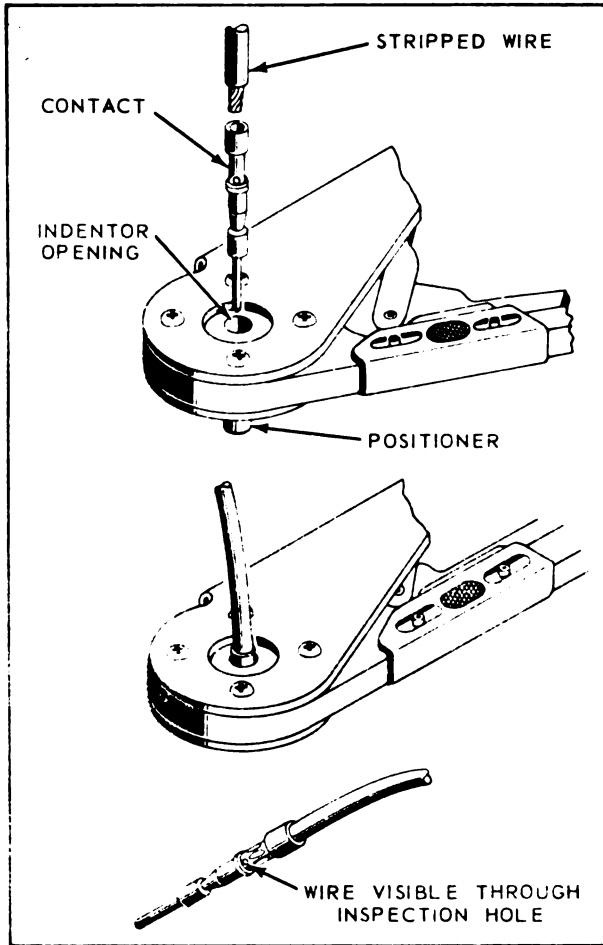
Assembling Wires to Crimp-Type Contacts
